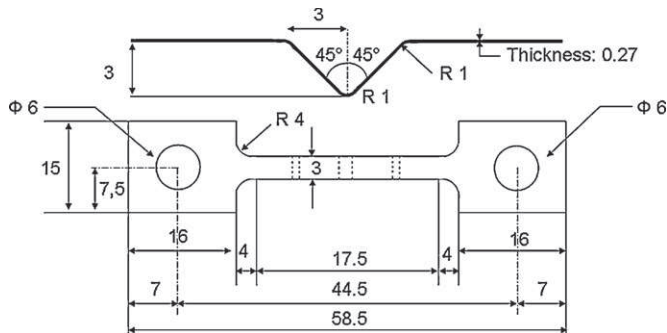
Geometry of tensile specimens after cold stamping (dimensions in mm).
